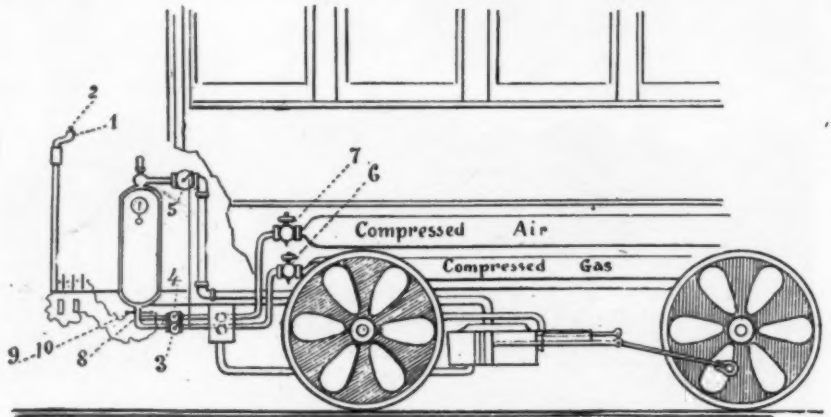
MOTOR CAR WITH GENERATOR IN POSITION.
